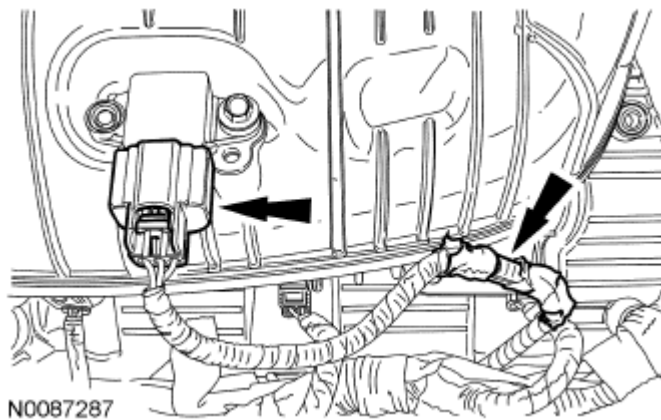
Locating Manifold Absolute Pressure Electrical Connector
